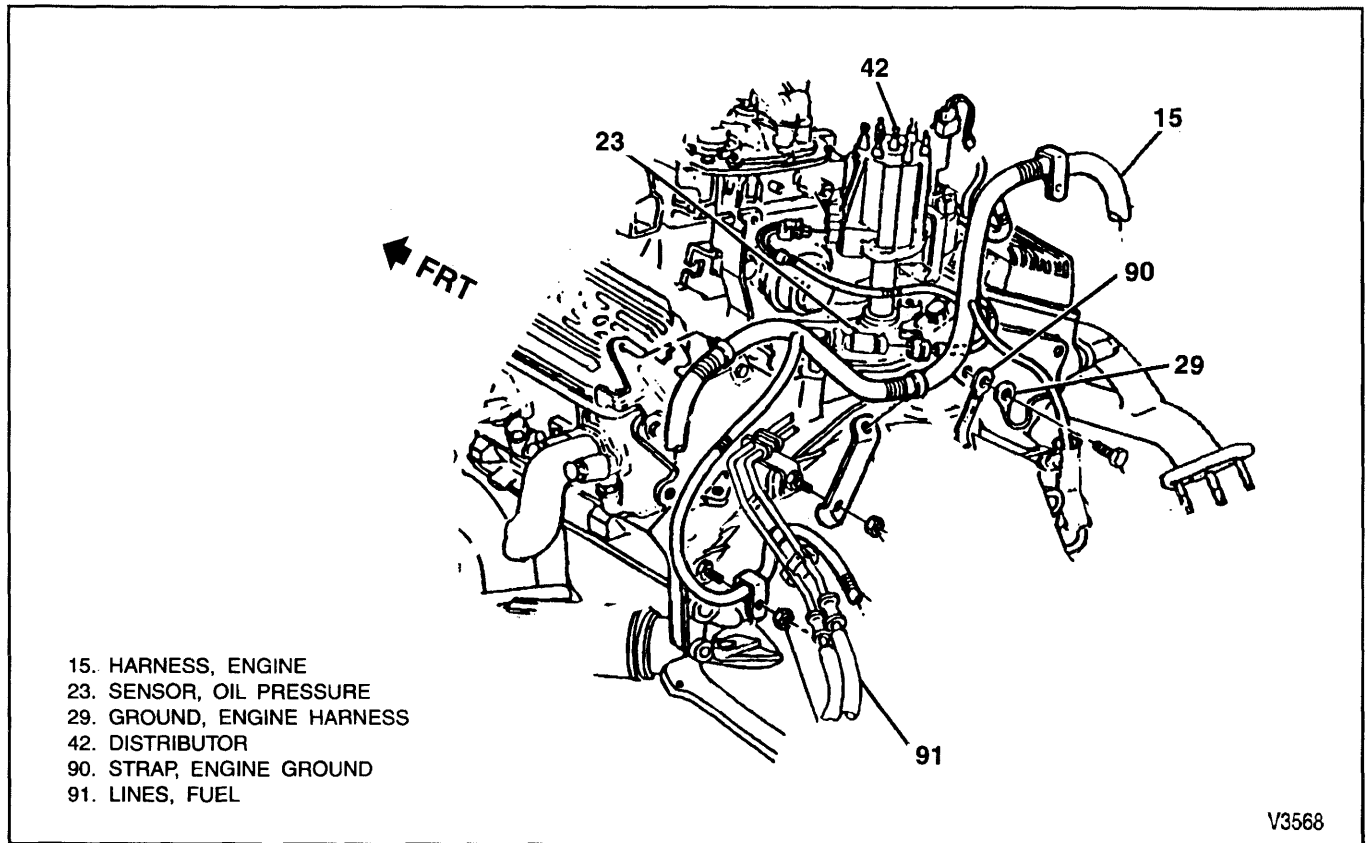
Engine Wiring - Rear (4.3L VIN Z)
